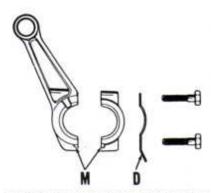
Connecting rod assembly used on Models VH70, VM70, VM80, VM100, HH70, HM70, HM80 and HM100. Note position of oil dipper (D) and match marks (M).
